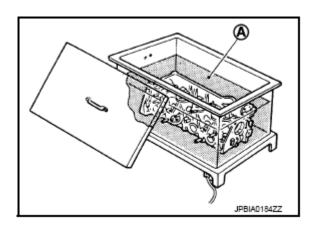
Heating Cylinder Head Using Heated Oil Courtesy of NISSAN NORTH AMERICA, INC.
